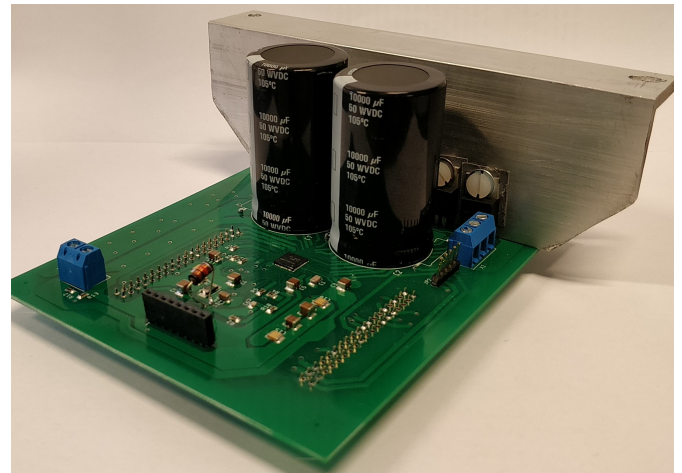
A picture of the PCB where the DSP can be plugged in on the other side.
